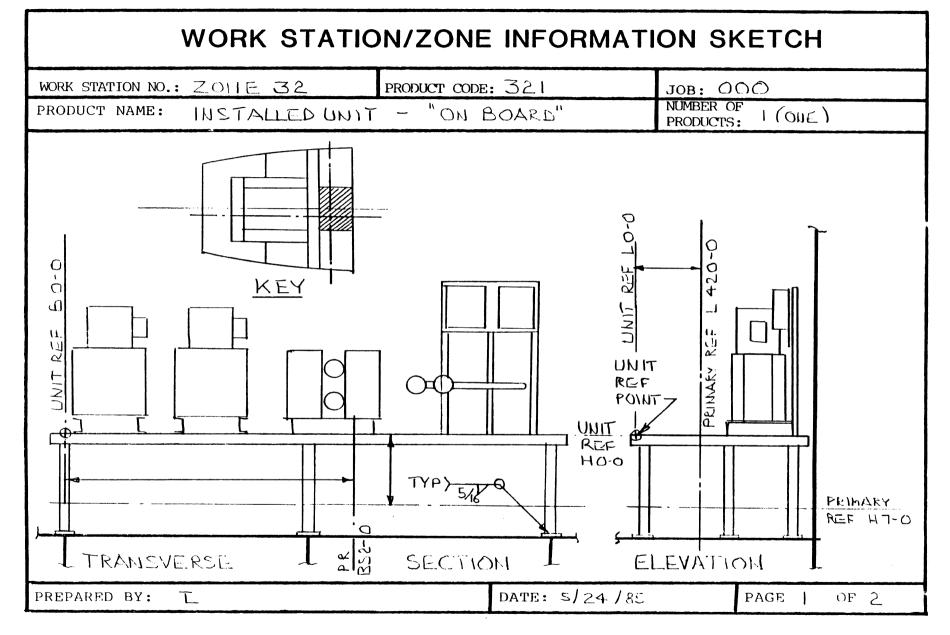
"On-board" advanced outfitting unit installation work station information.
